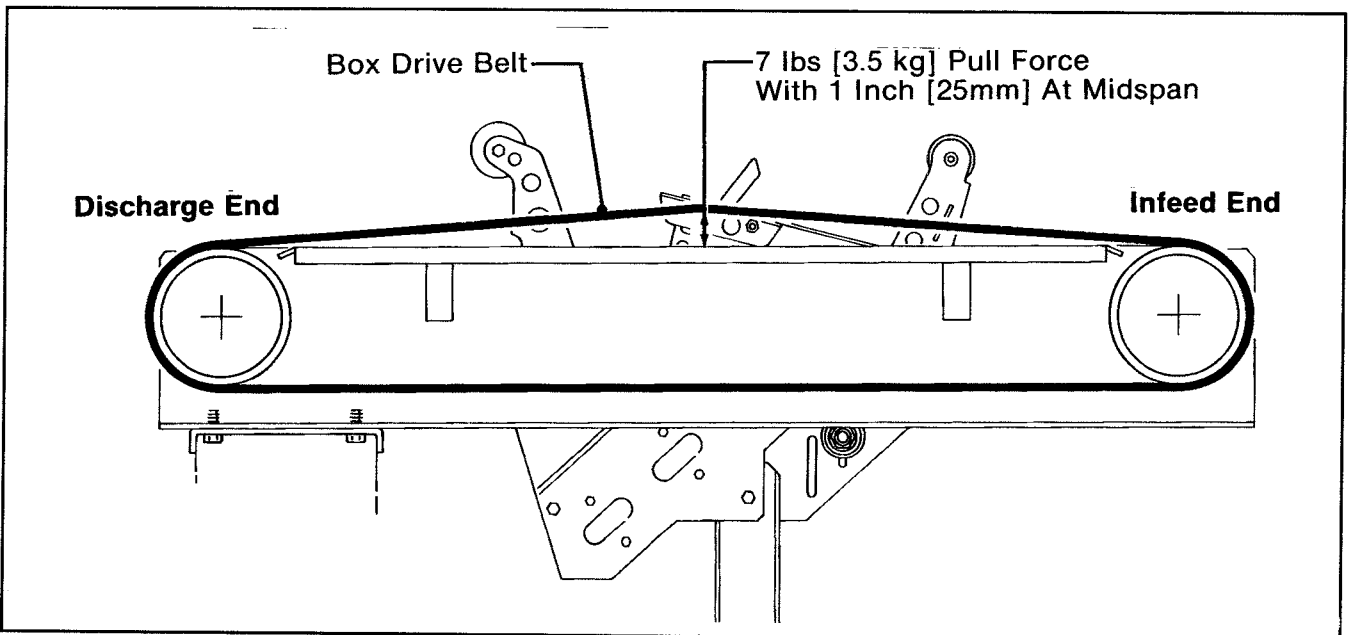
Box Drive Belt Tension Adjustment, Lower Belts (Left Side View)
